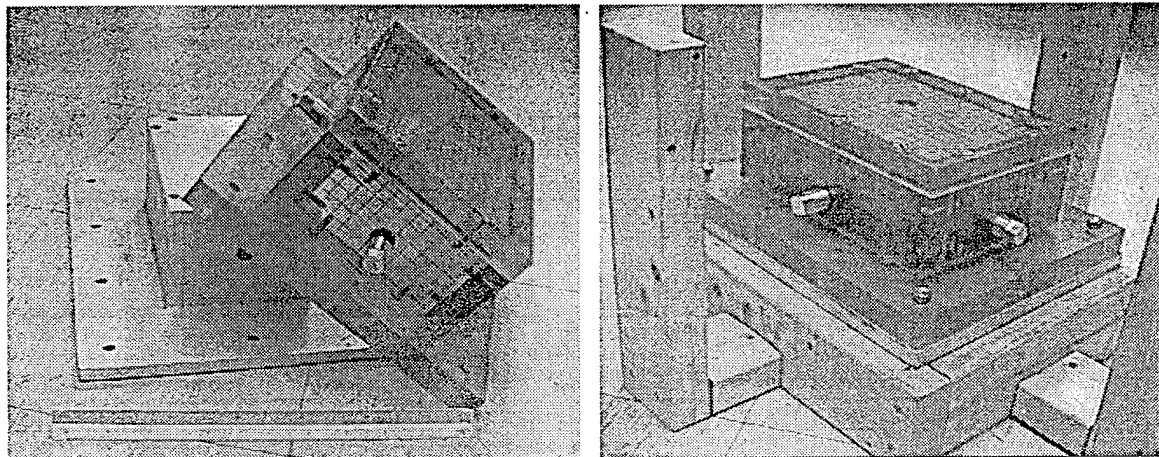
Left: Mold in pieces, Right: Mold assembled on wooden frame
